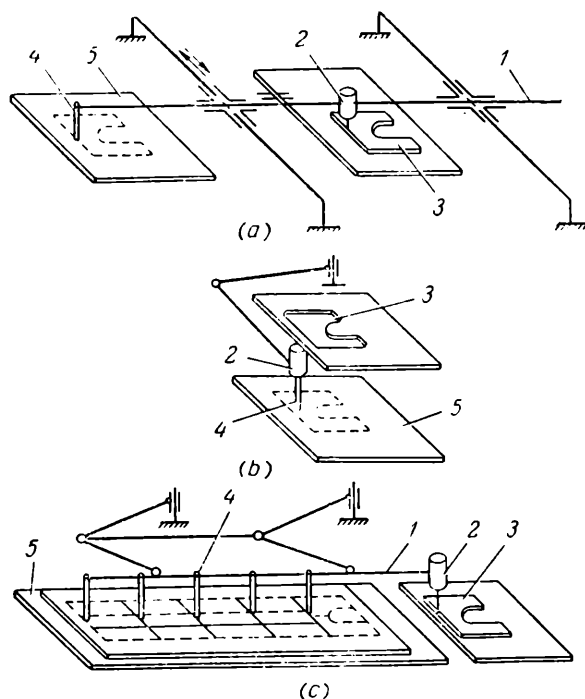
Kinematics of stationary cutting machines: *a* — rectangular-co-ordinate cutting machine; *b* — polar-co-ordinate (camograph) machine; *c* — pantographic machine; 1 — arm to carry the torch and tracing head; 2 — tracing head; 3 — template; 4 — torch; 5 — cutting table
